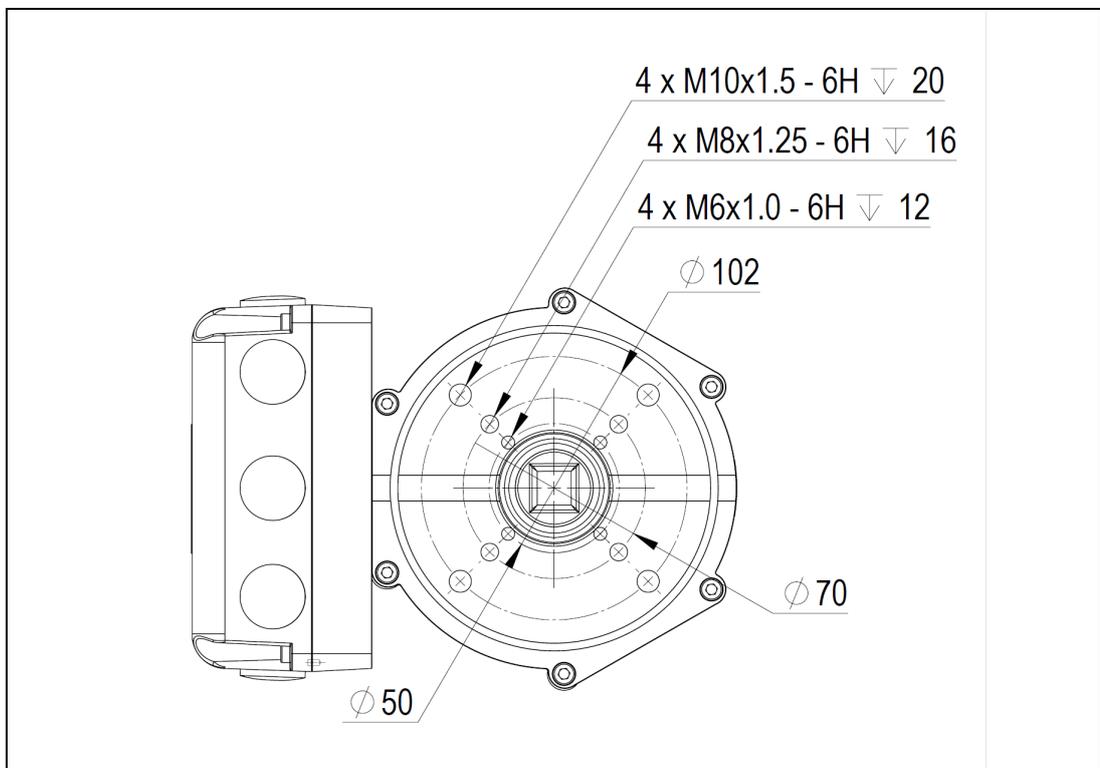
QT70, QT250 and QT400 Valve flange fastening holes
